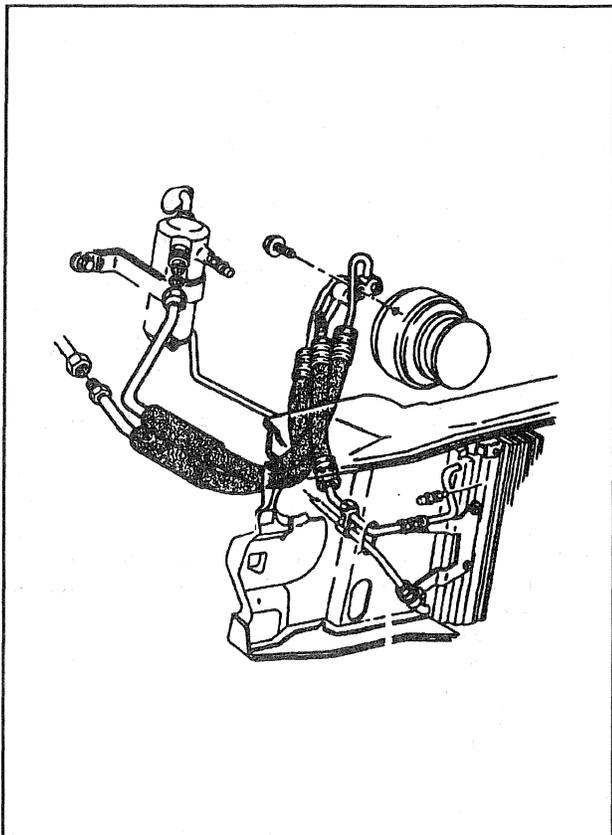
Compressor and Condenser Hose Assembly (Suburban with Aux. A/C)
